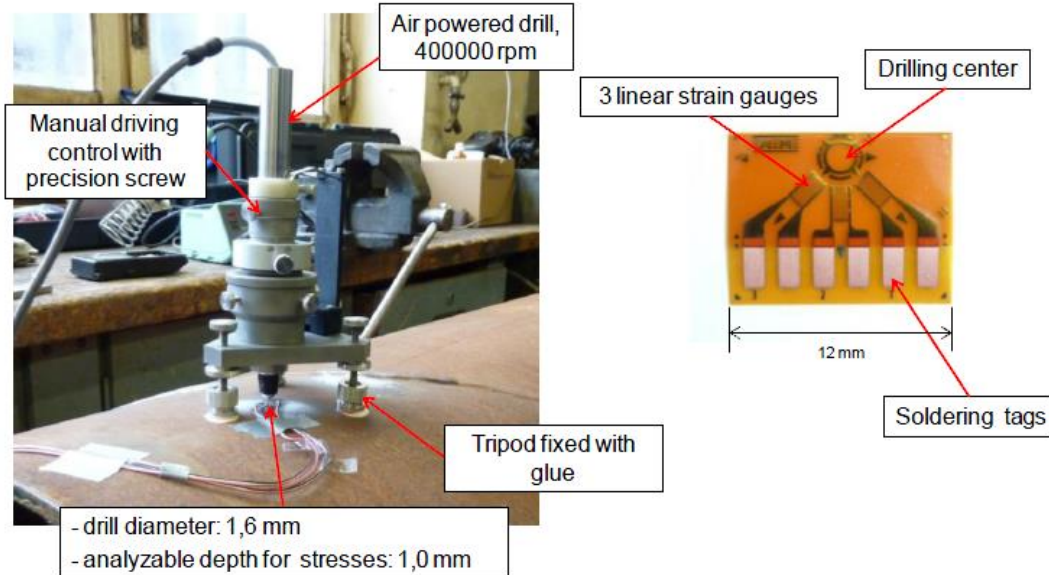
Drilling mill and strain gage in the hole-drilling-method.
